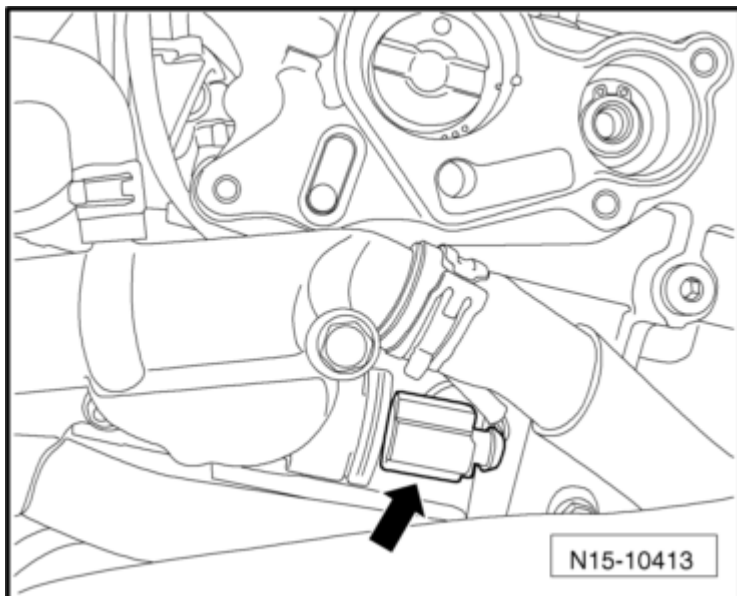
Identifying Connector -Arrow- To Engine Coolant Temperature Sensor
